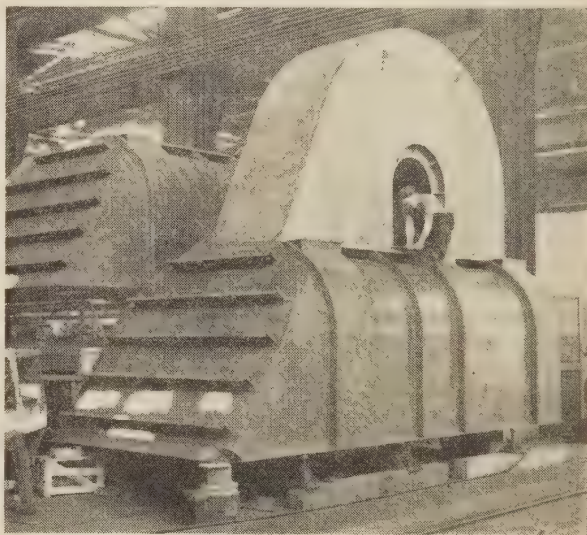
UPPER AND LOWER WELDED-STEEL-PLATE IMPULSE-WHEEL HOUSINGS
